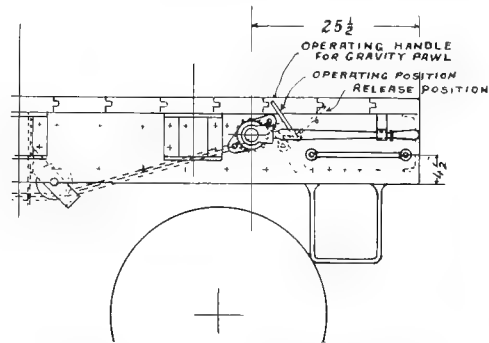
Normal Position of Operating Handle for Blackall and Lindstrom Brakes.
